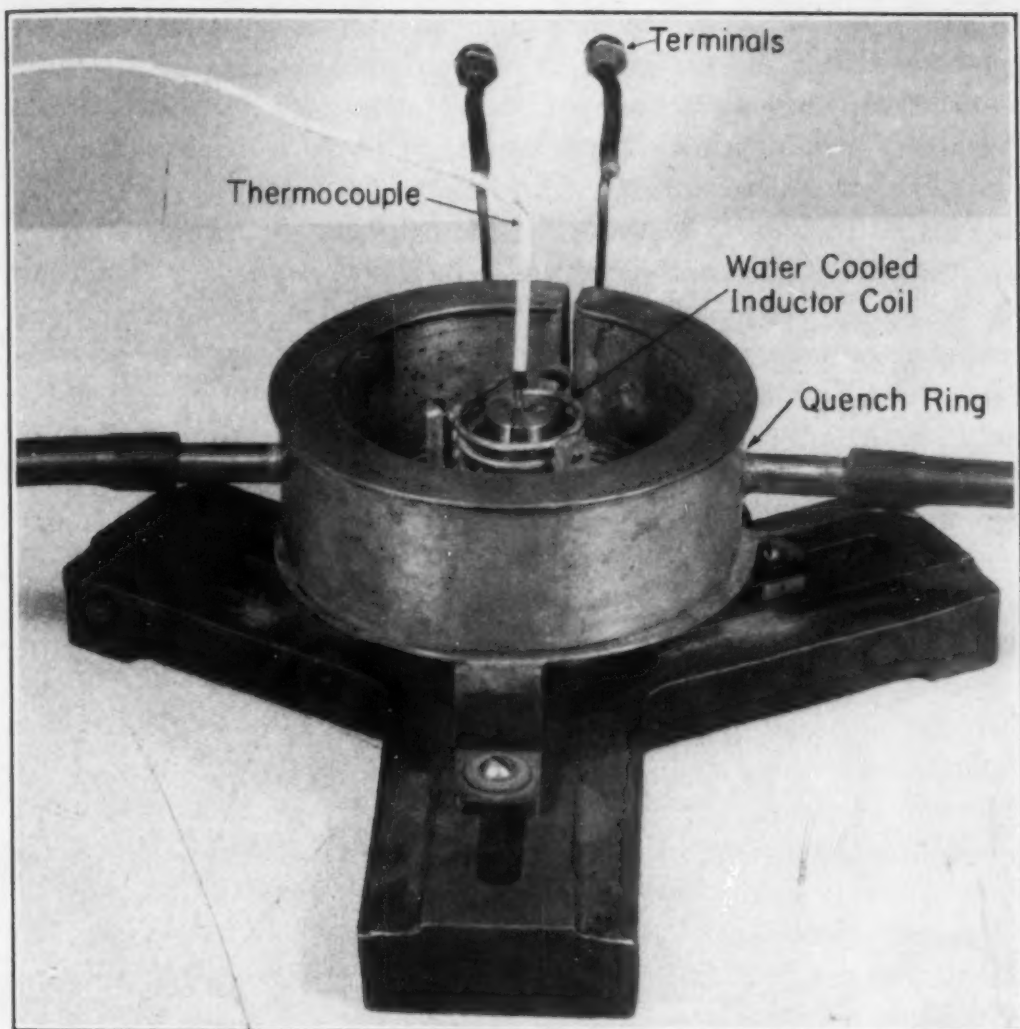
The Induction Heating Fixture with the Sample and Thermocouple in Position.
